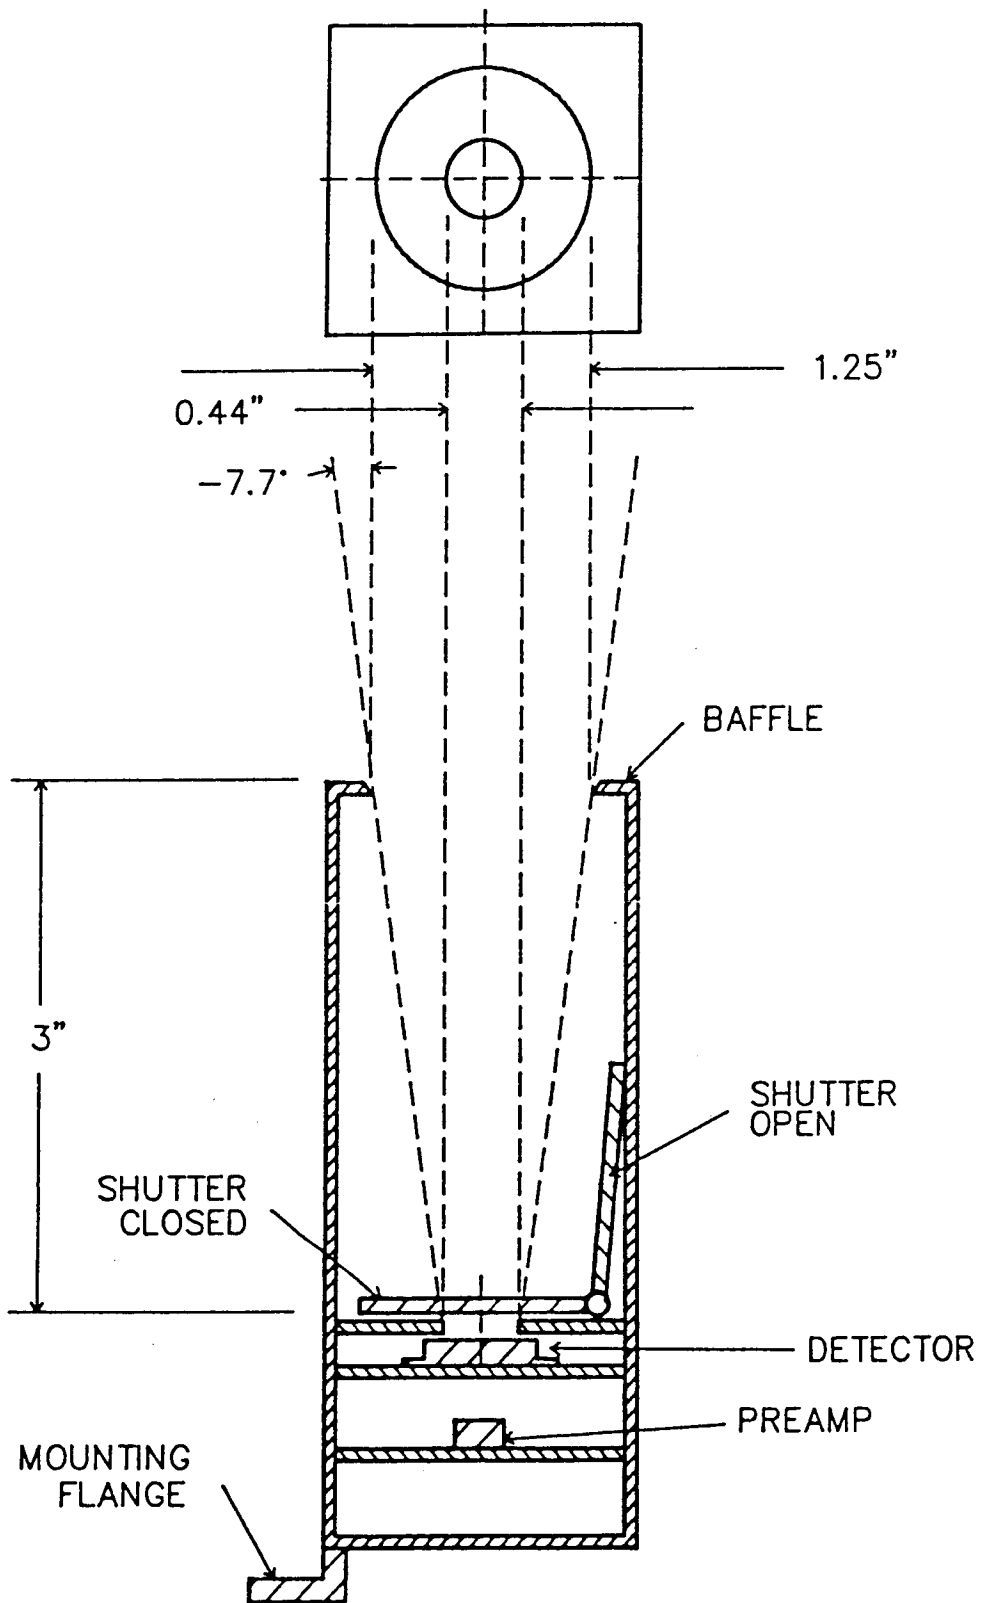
Cutaway view of DEC beam uniformity detector/baffle assembly.
